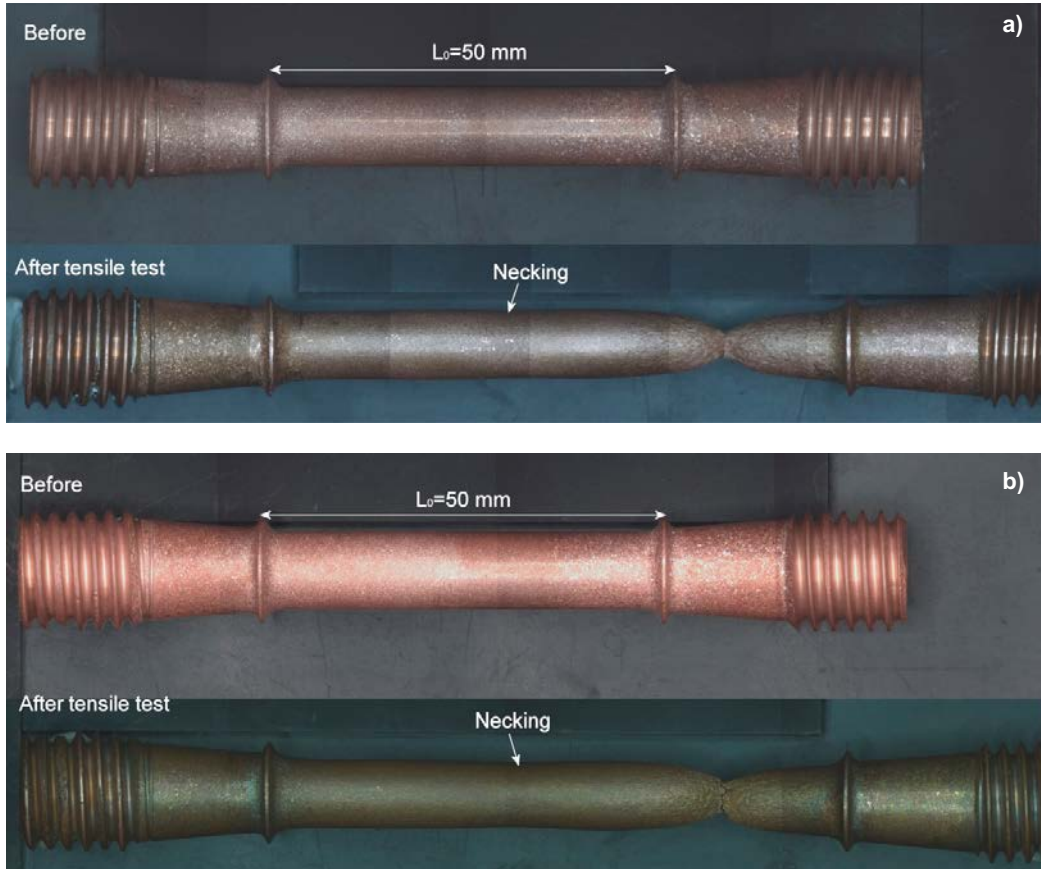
Cross-weld tensile test specimens from segment 3 with 0 μm initial oxide layer thickness before and after hot tensile testing at a) 75 °C and b) 175 °C.
